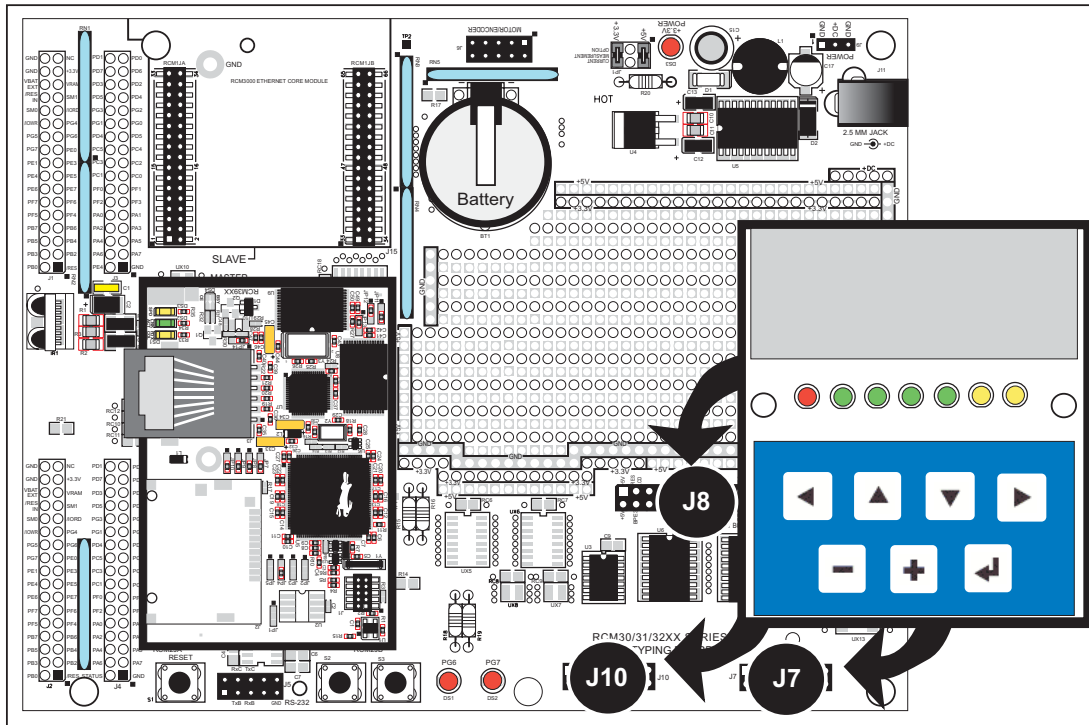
Install LCD/Keypad Module on Prototyping Board
